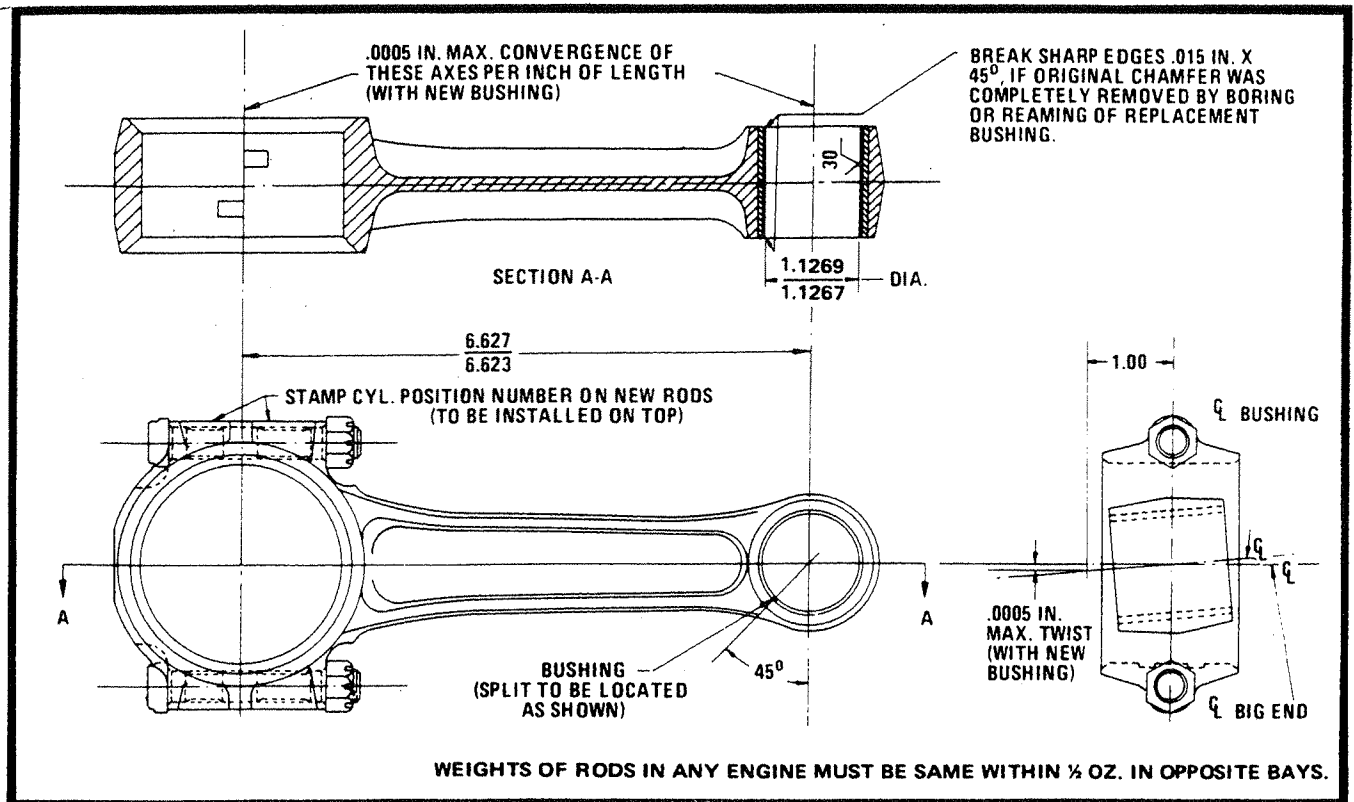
CONNECTION ROD AND BUSHING DIMENSIONS.
